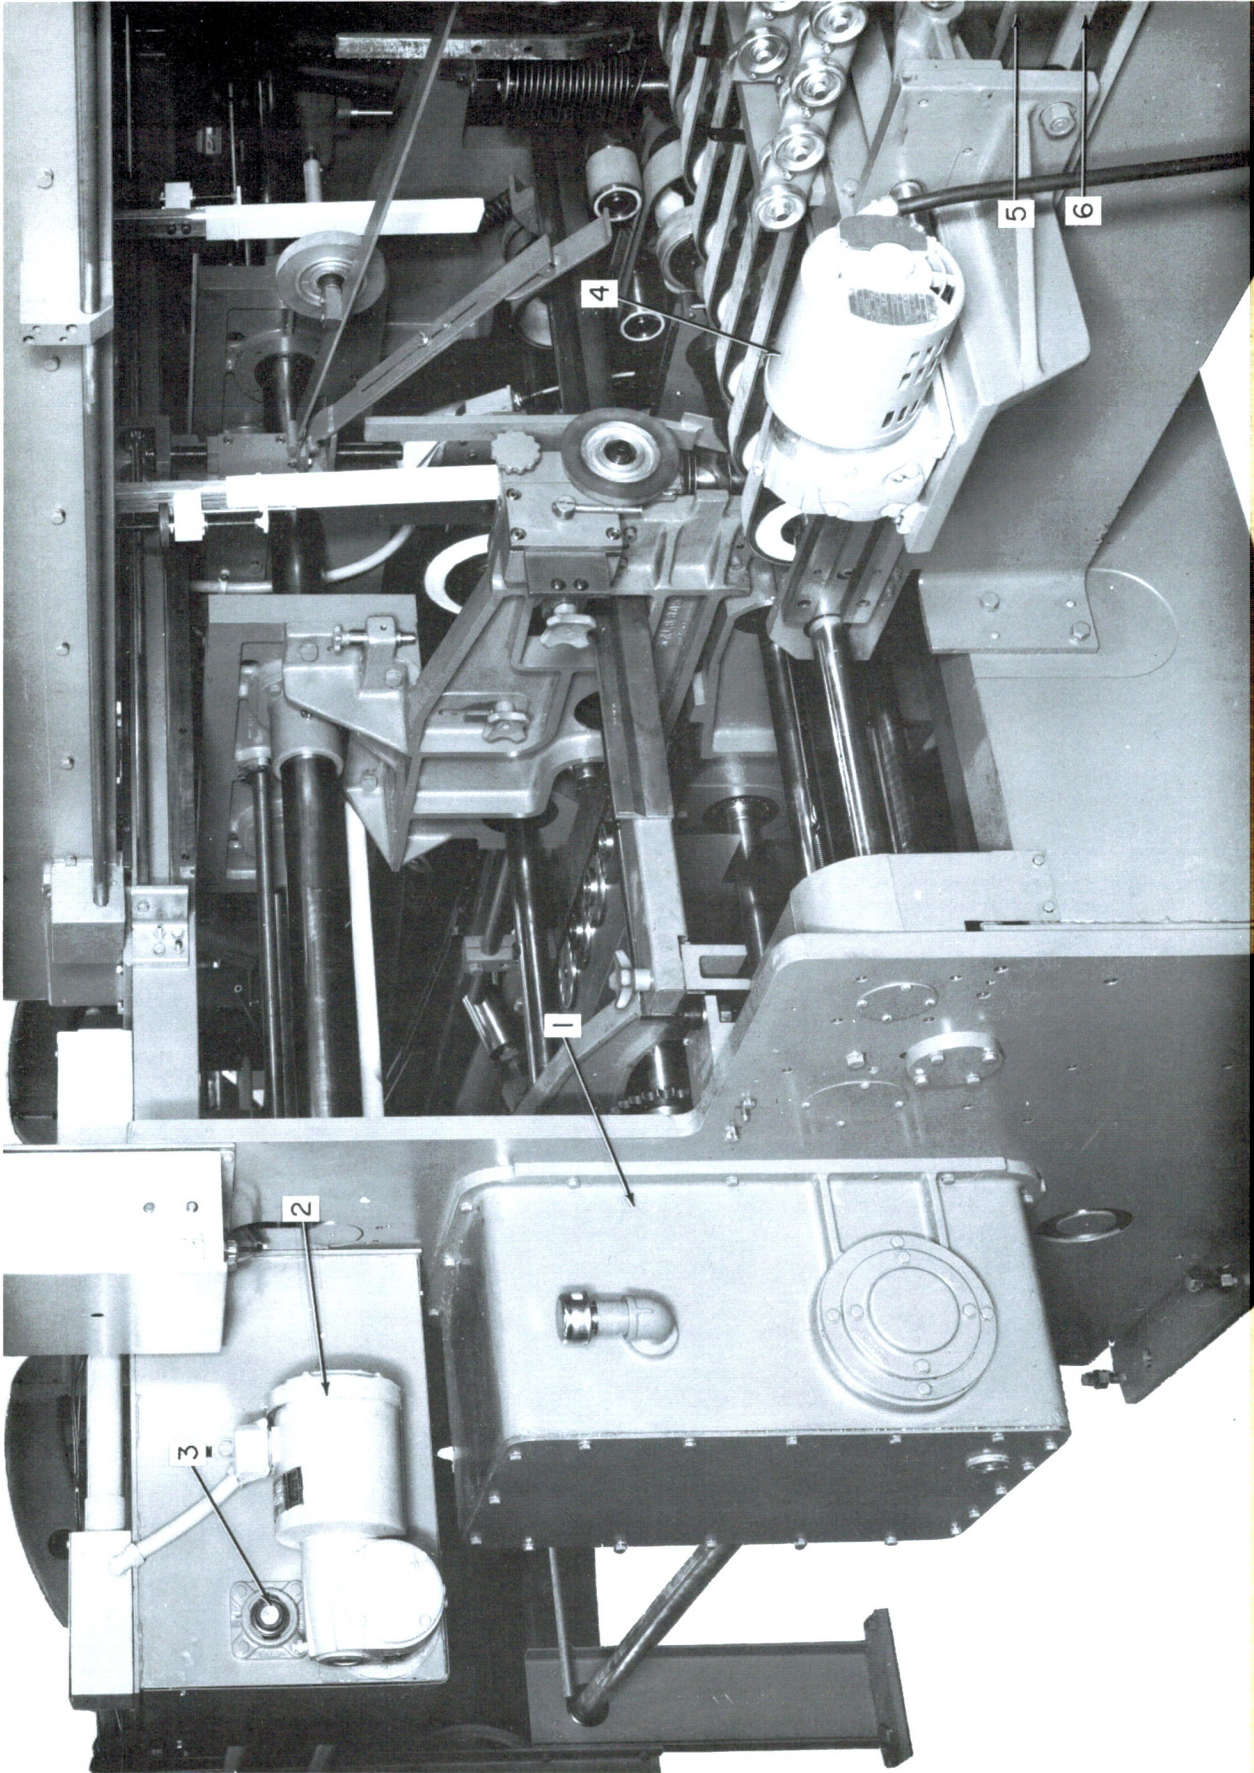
DELIVERY END LUBRICATION, DRIVE SIDE (VIEW 2)
